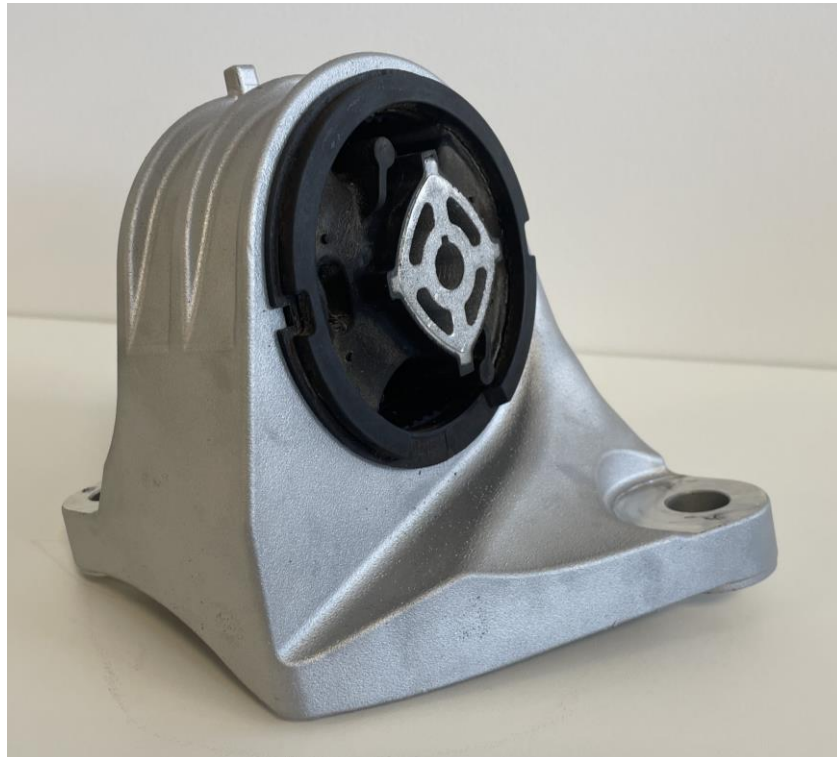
Post-processed 3D printed bracket with rubber bushing mounted.
